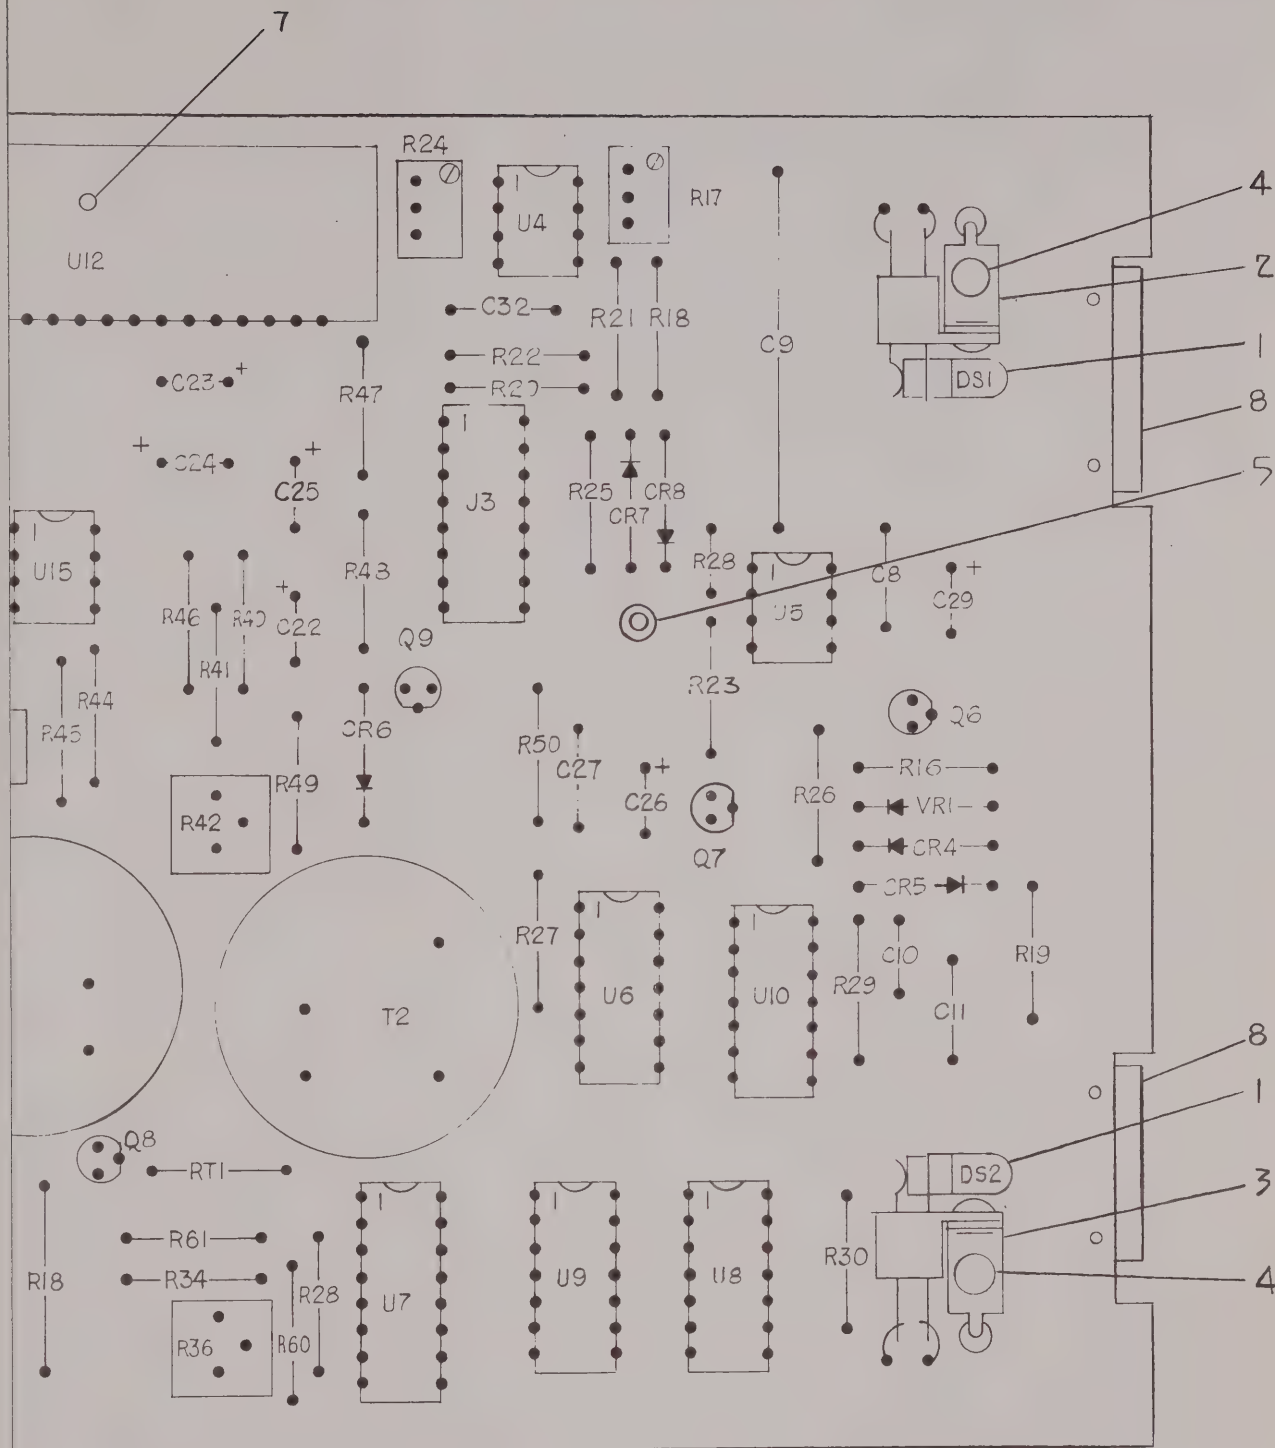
A3, Localizer, DVM, Dimmer Assembly, Parts Location Diagram
